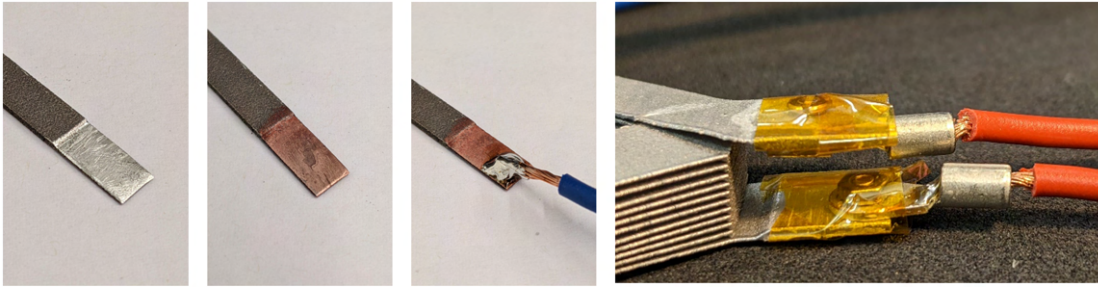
Deposition of copper onto aluminum for soldering wires; and mechanical connection of the coils
